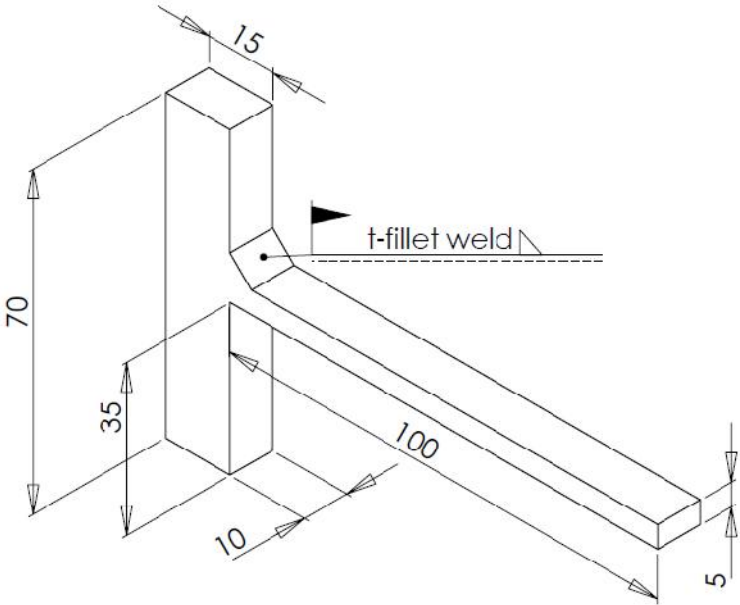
Isometric drawing of a dynamic loading specimen (All dimensions are in millimeters)
